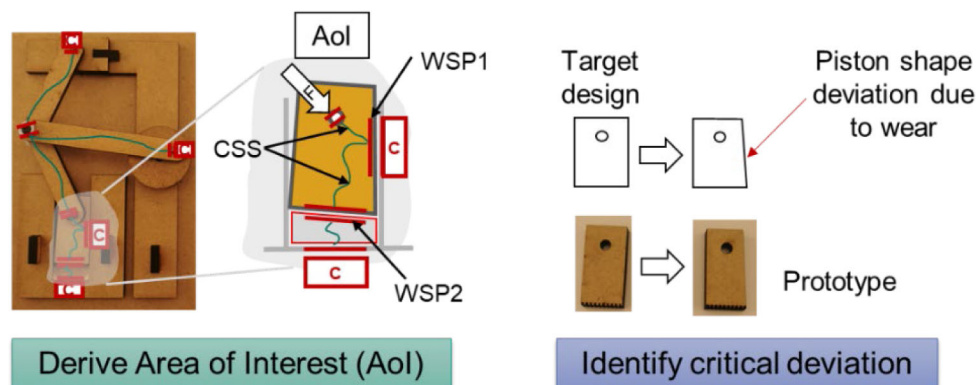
Case study of a coining machine, its principal sketch and prototype
